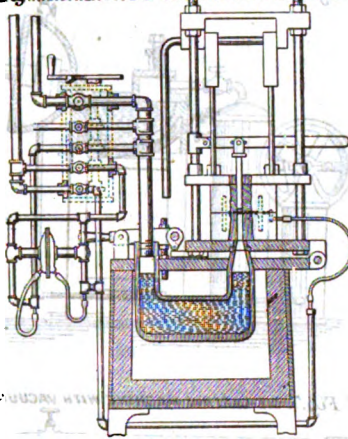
EARLY TYPE OF DOEHLE MACHINE
